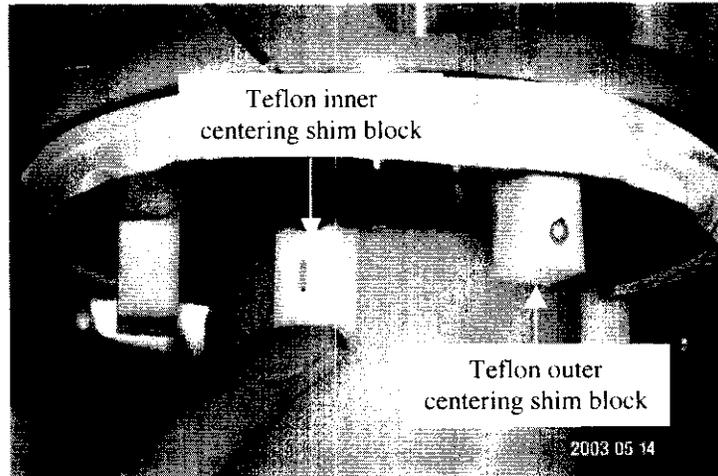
The installed Teflon centering shim blocks.
